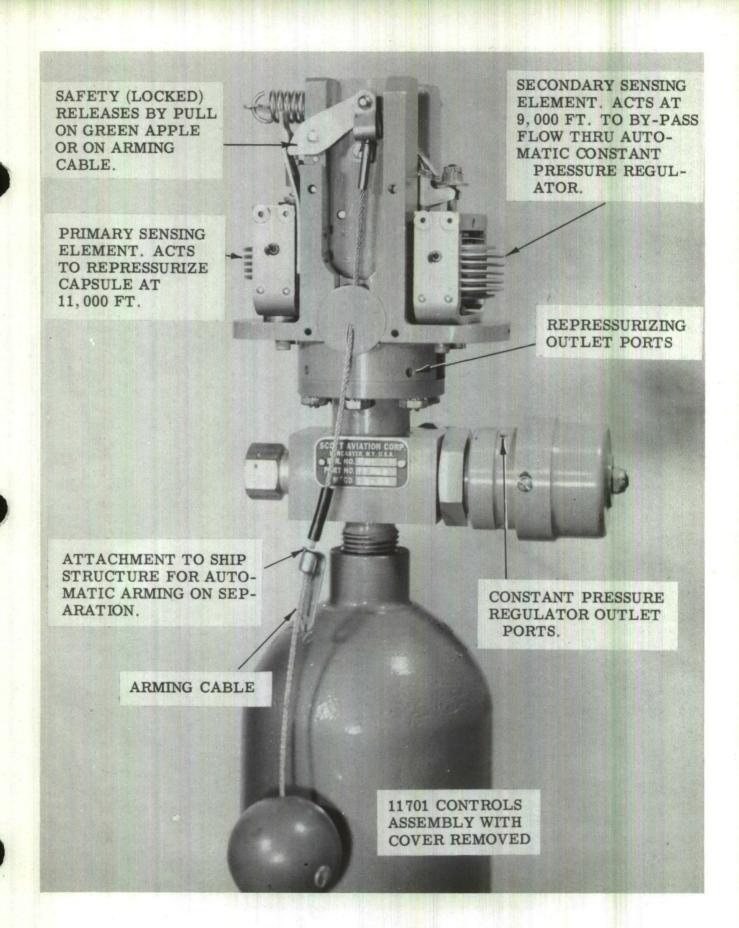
CONTROL ASSEMBLY, COVER REMOVED, CABLE SIDE .
